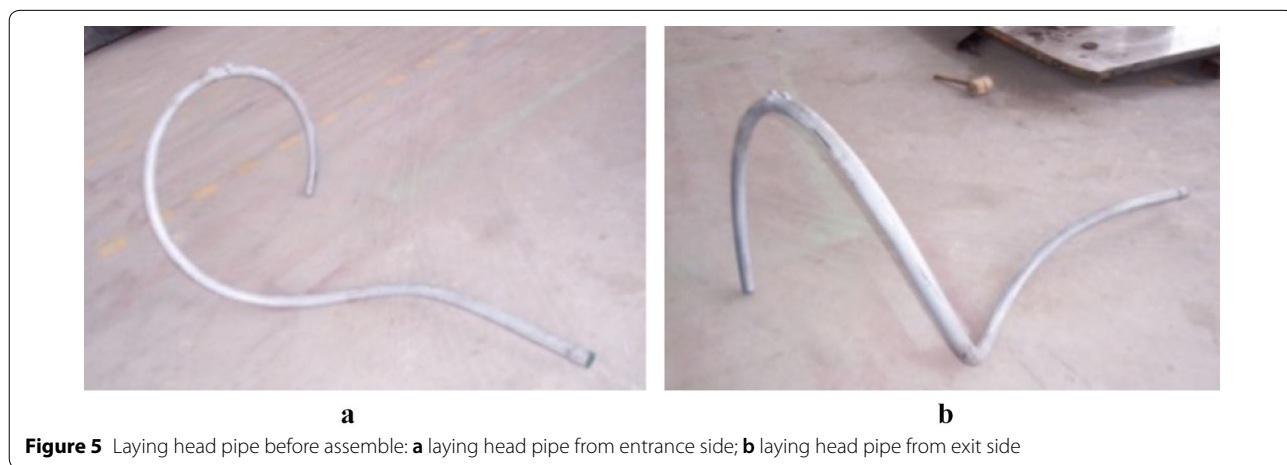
Laying head pipe before assemble: a laying head pipe from entrance side; b laying head pipe from exit side
